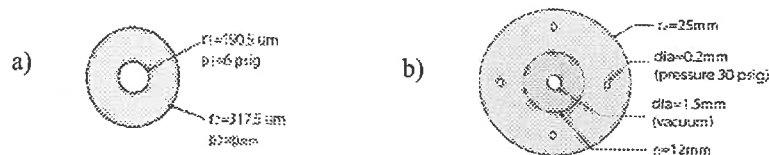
Geometry and dimensions of (a) top bearings and (b) bottom bearings.
